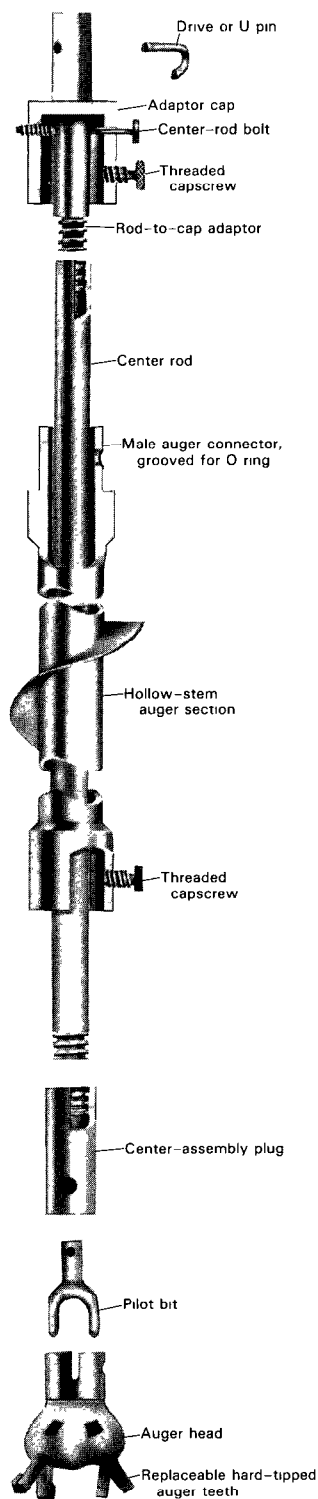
Hollow-stem auger section with center-rod assembly and accessory components.
